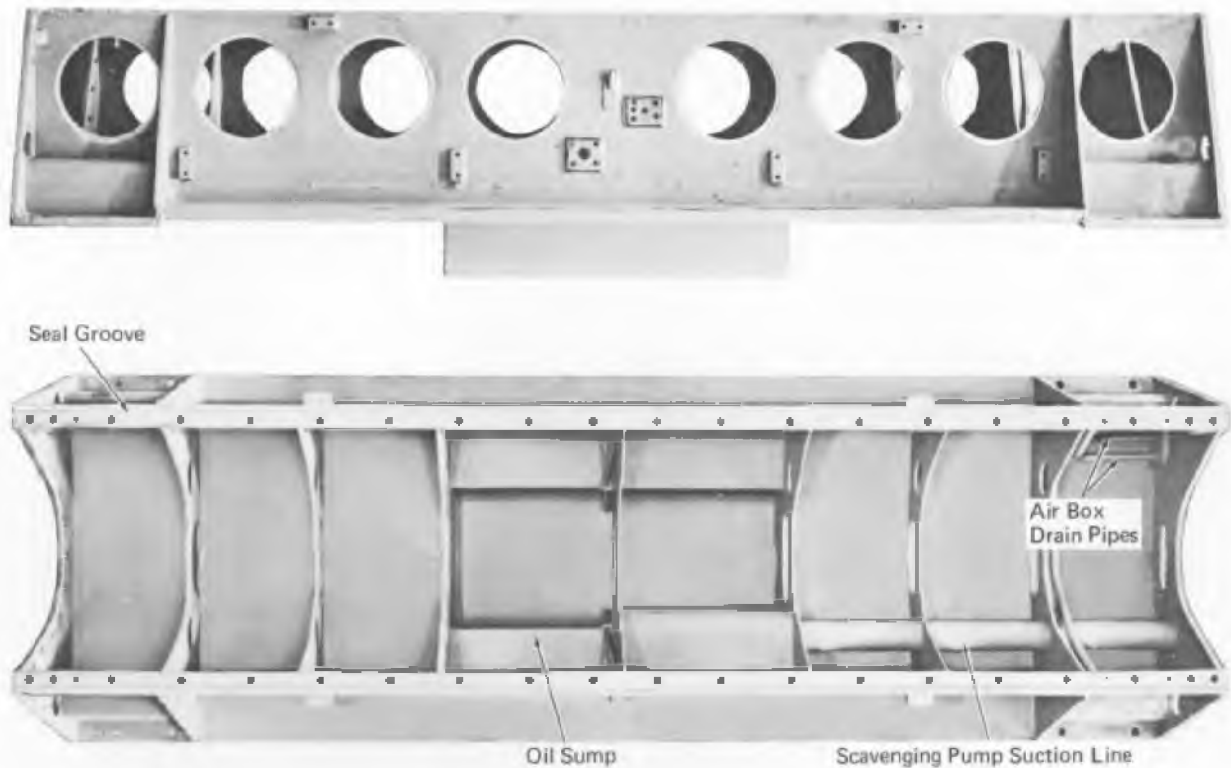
Typical Oil Pan (16-Cylinder)
